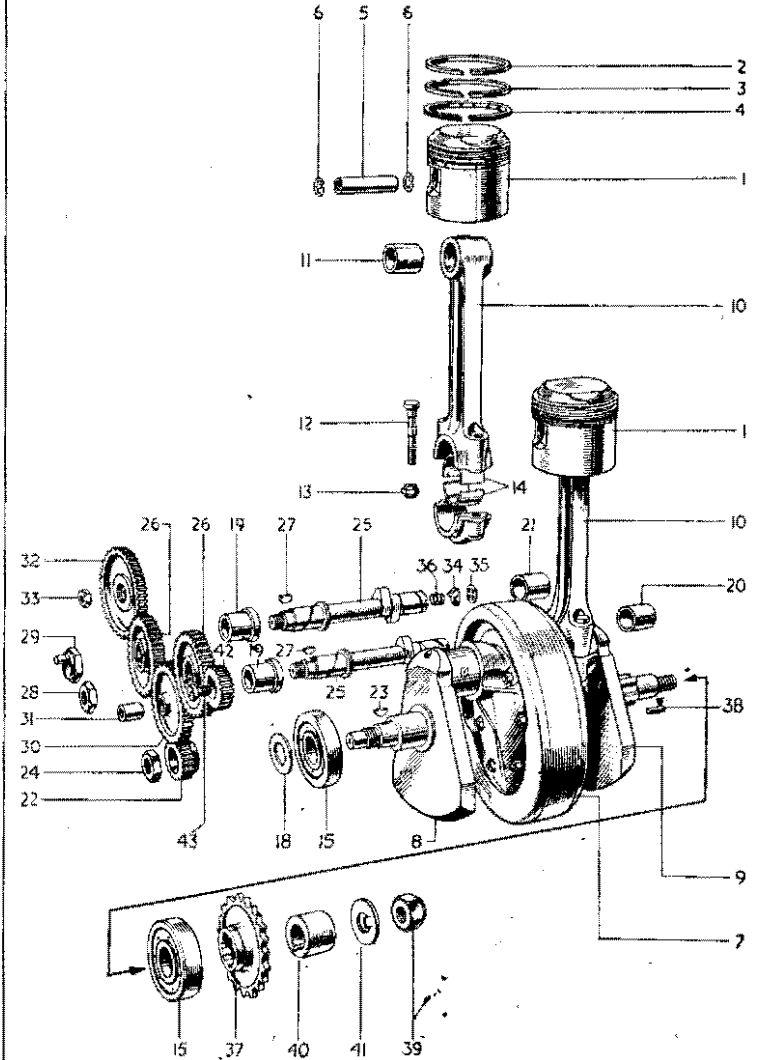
CRANKSHAFT, CONNECTING RODS, PISTONS, TIMING GEARS, etc.
